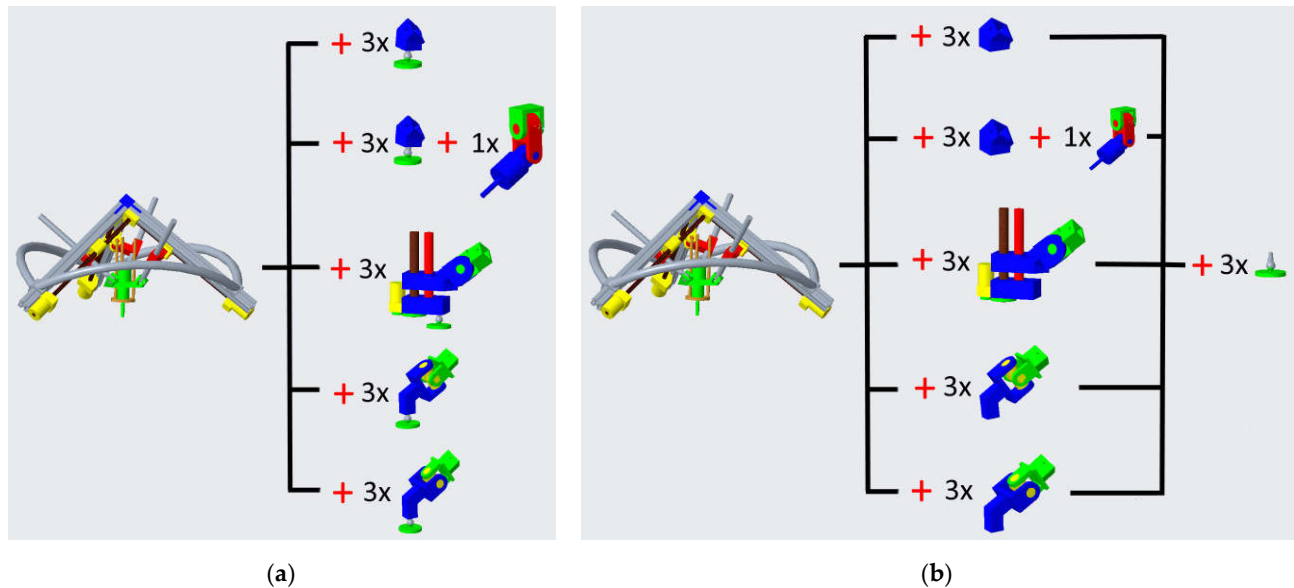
Two possible reconfiguration scenarios using modularity: (a) the attachment pad and spherical joint are included in each module, and (b) the attachment pad and spherical joint are made as separate modules.
